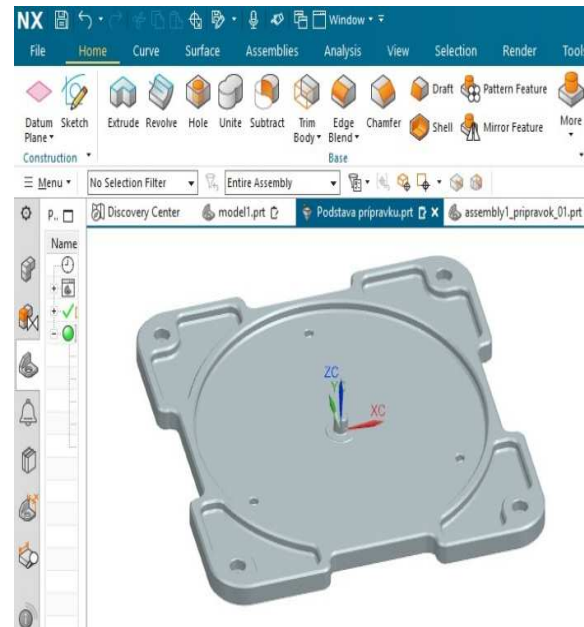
3D CAD model of the base of the adjustable positioning fixture
